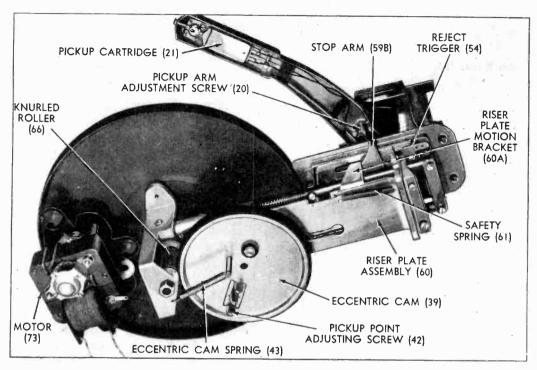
RECORD CHANGER, BOTTOM VIEW SHOWING LOCATION OF PARTS
